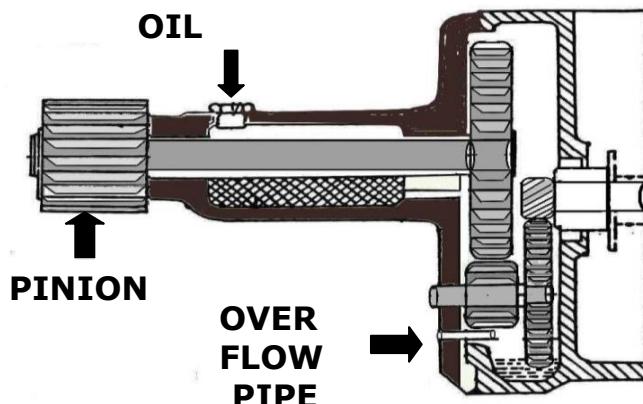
OILING OF GEAR BOX (reduction gear)
